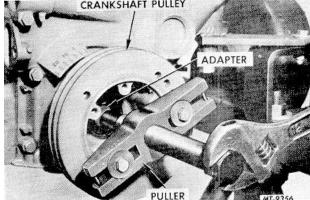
Crankshaft Pulley Hub Removal Using Puller SE-1368
